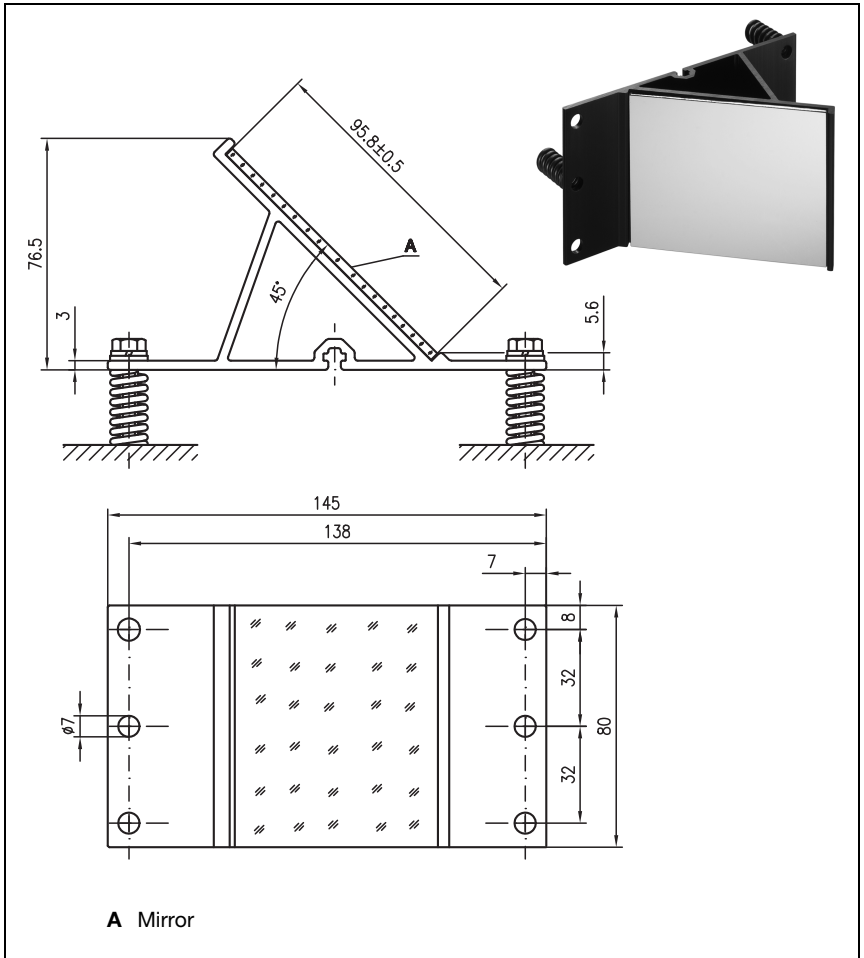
Photo and dimensioned drawing of the US 1 OMS deflector unit
